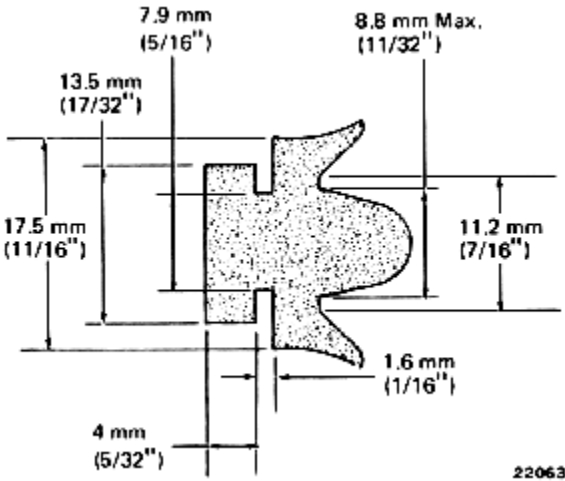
Sash-To-Sash Bumping Weather Strip
